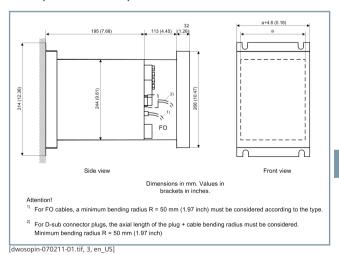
/22 1/3 Surface-Mounted Device with Integrated On-Site Operation Panel, Dimensions in the Side and Front Views
